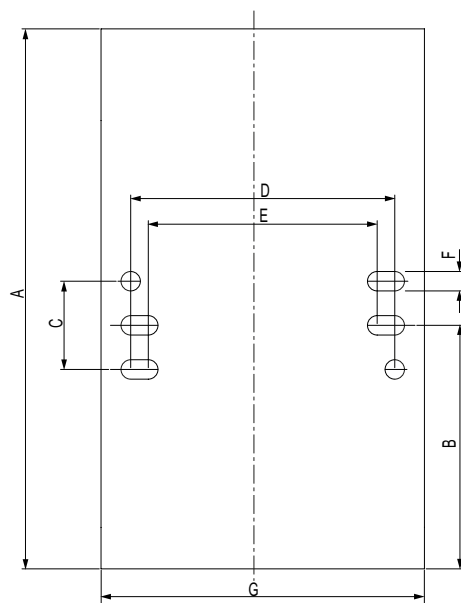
Hole drilling template: Fuse switch disconnectors sizes 1, 2, 3
